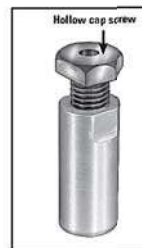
C Stem removal tool for NPS ¼-¾ valves
